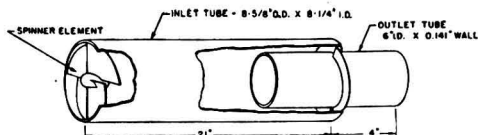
DIMENSIONS OF AMERICAN BLOWER CORP. SERIES 361 TYPE ST. SEPARATOR TUBE.
